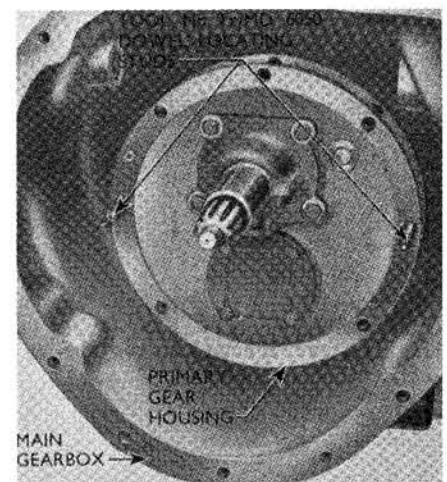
Removal and installation of primary gearbox (housing) assembly is made easier by use of locating studs.
